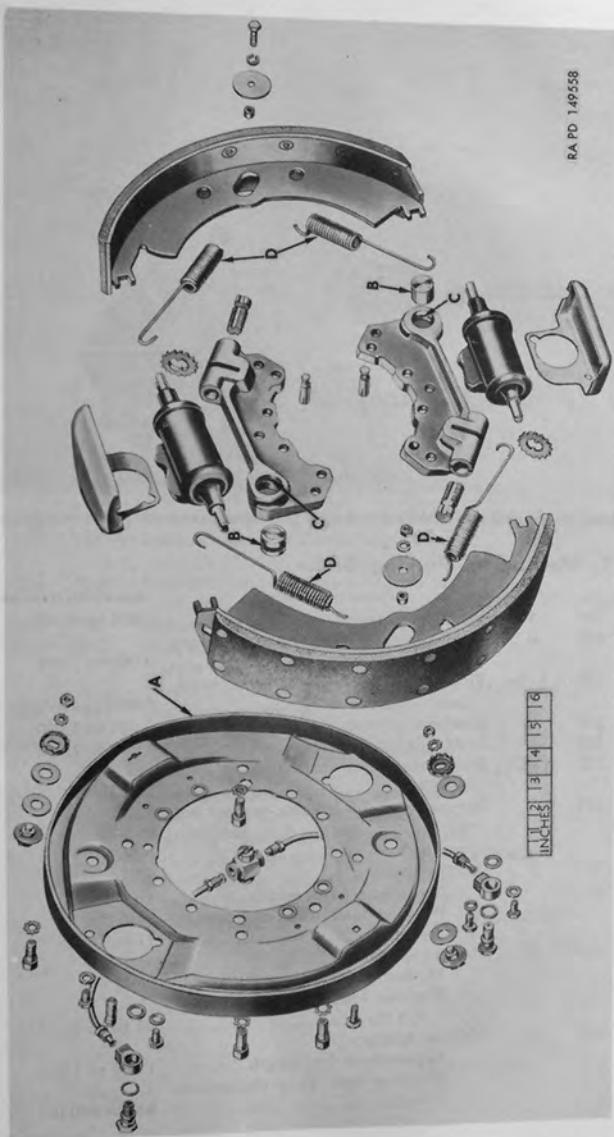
Repair and rebuild standard points of measurement for service brakes.
